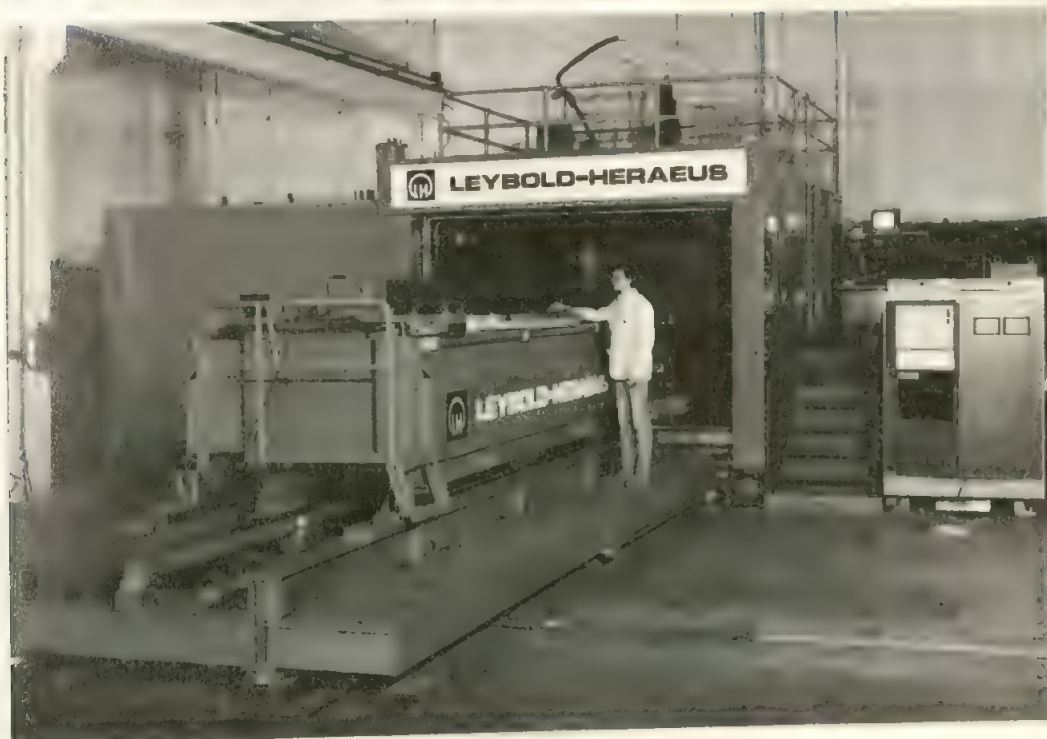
Electron beam welding catalytic converters in air.
